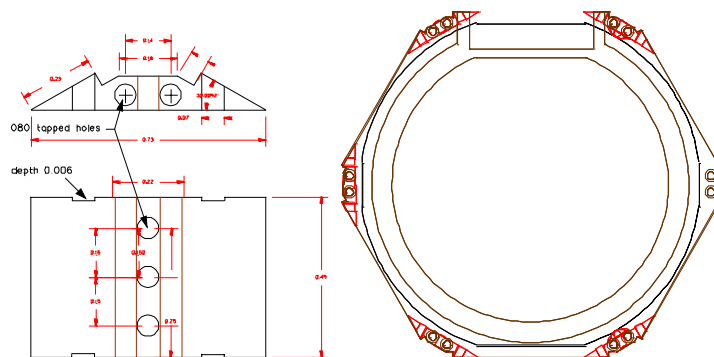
The major copper mounting parts. Two hexagonal rings (right) sandwich six copper posts (left) to create a housing for the detector.
